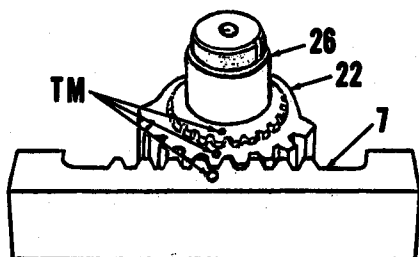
When reassembling steering motor, be sure that timing marks (TM) on rack (7), pinion (22) and shaft (26) are aligned as shown.
